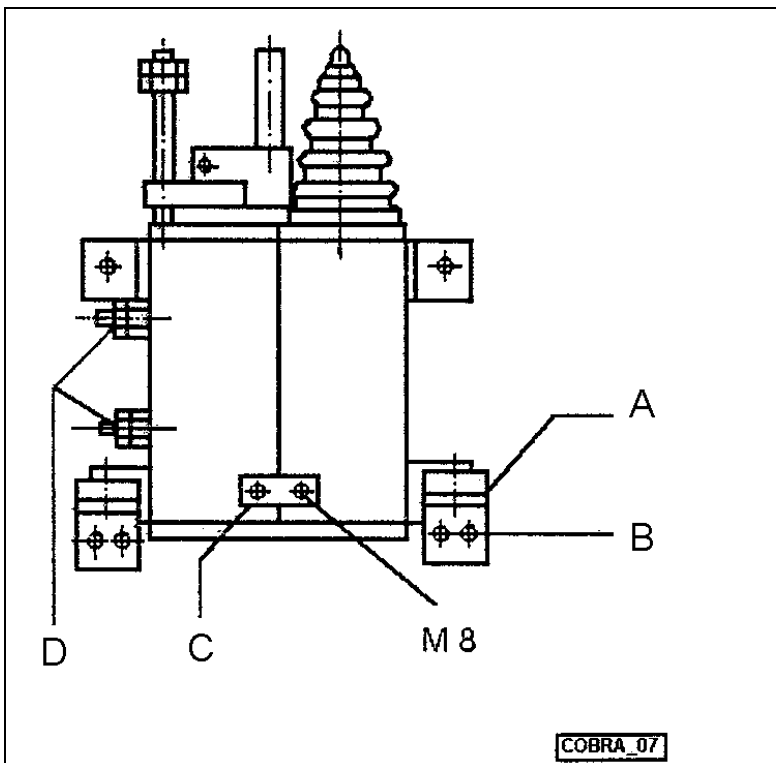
Adjustment of the distance pick up arm - lubricating head
